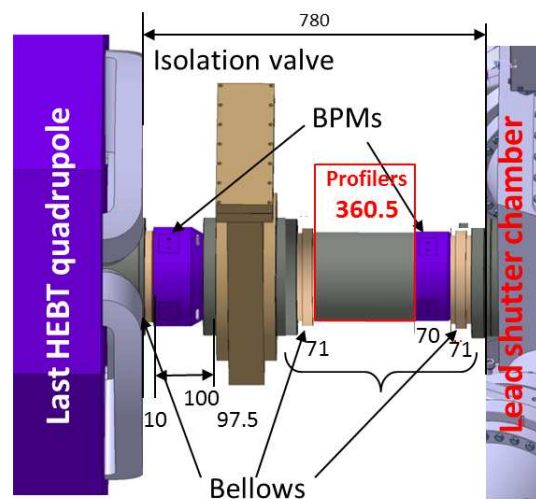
Schematic drawing of the HEBT assembly, indicating the different components and the 360.5 mm available for the profilers, by courtesy of Beatriz Brañas (CIEMAT)
